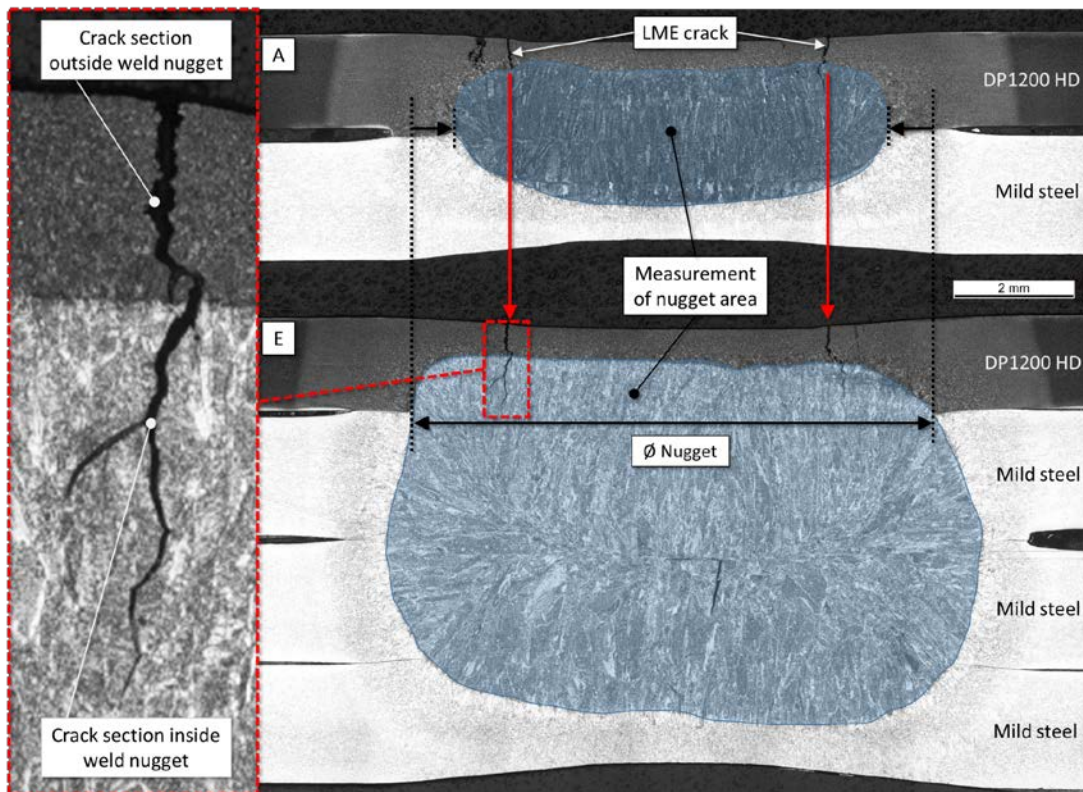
Cross-sectional comparison of weld nugget and crack formation for weld processes (A) and (E).
